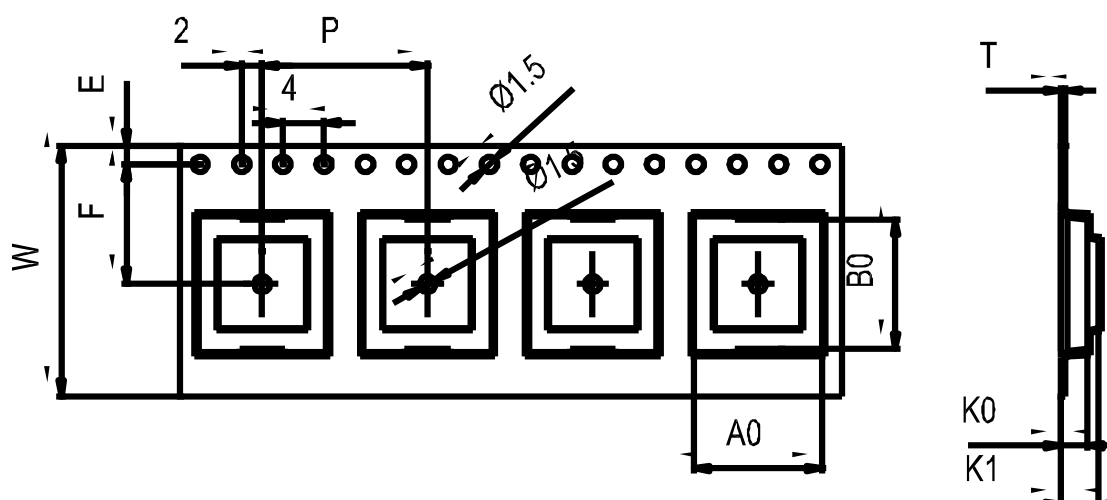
Carrier Tape Dimension Drawing (Unit: mm)
